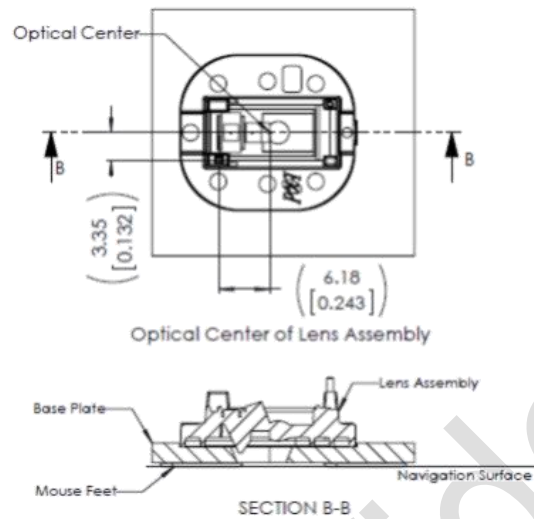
Cross Section View of LM19-LSI Lens Assembly
